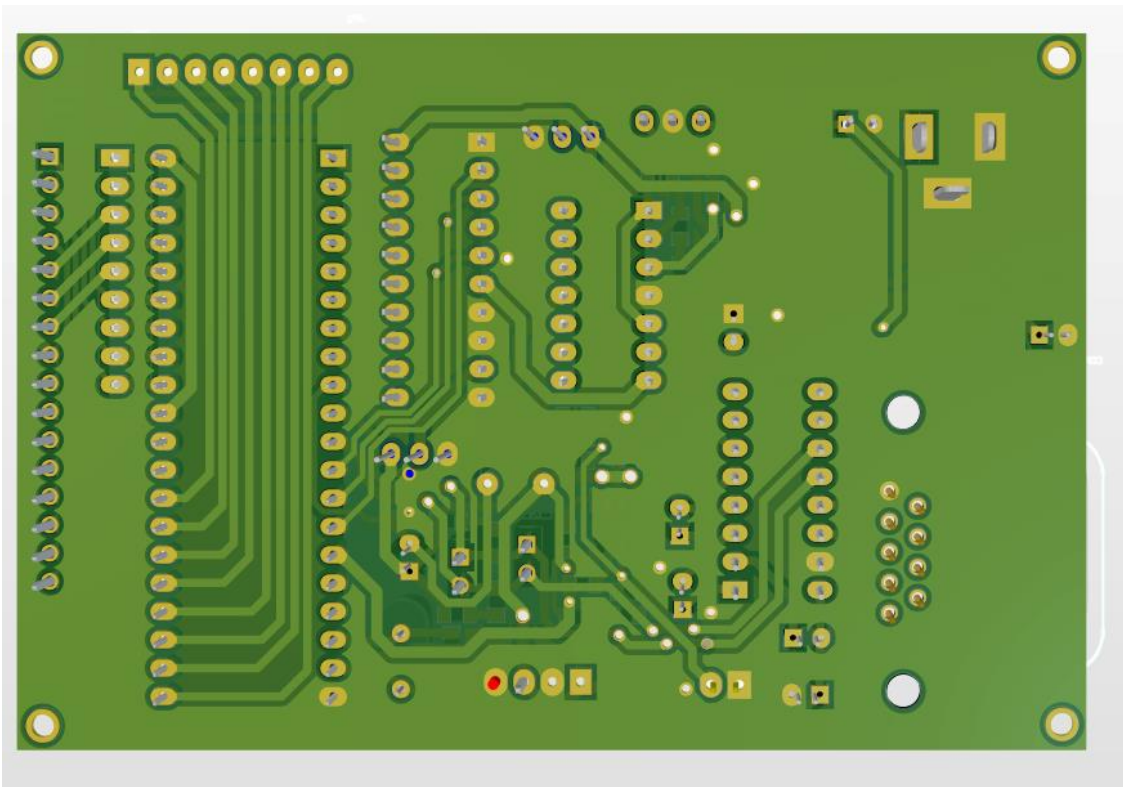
3D Simulation of the Bottom Layer of the PCB
